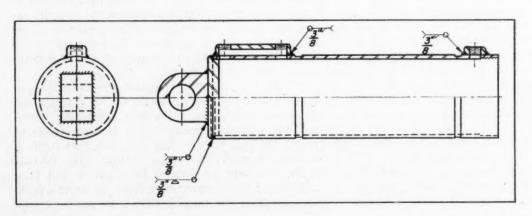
Hydraulic cylinder for powering blade of trailbuilder is fabricated of seamless steel tubing, bar and plate
